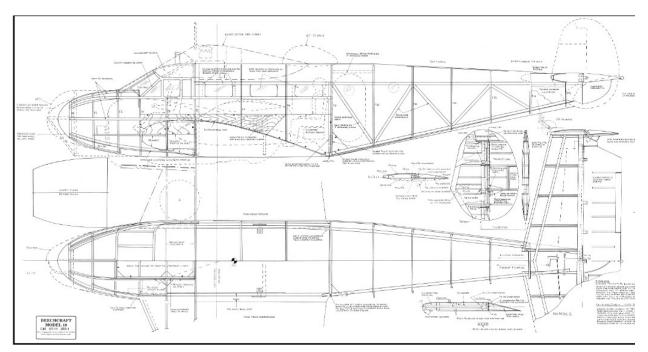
Drawing C45 AT-11 JRM-1 Fuselage Side and Top View
